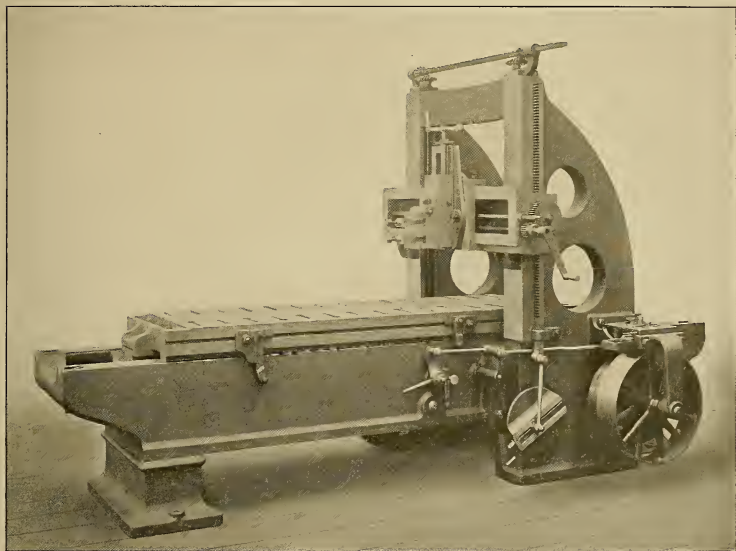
DOUBLE-BELT PLANING MACHINE. MADE BY MESSRS. POLLOCK & MACNAB, LTD., MANCHESTER, ENGLAND
